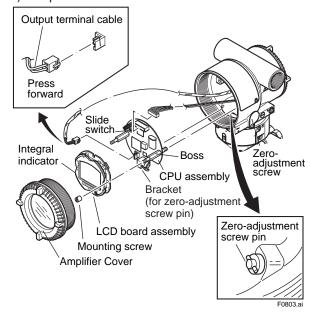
Removing and Attaching LCD Board Assembly and CPU Assembly
